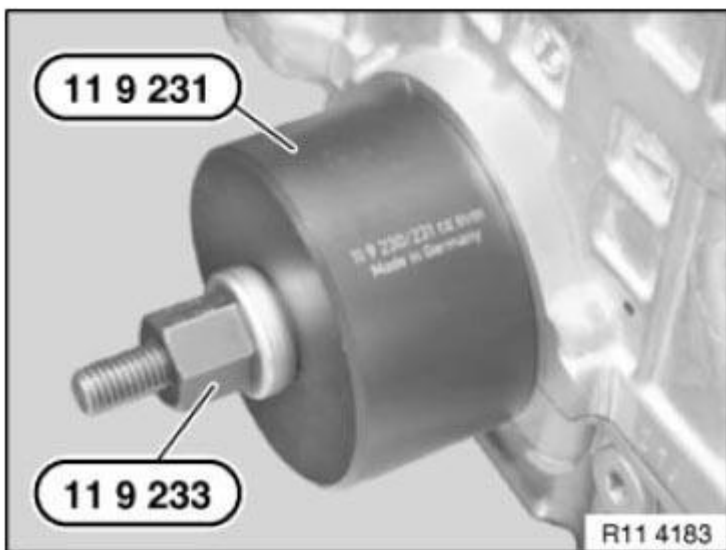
Identifying Special Tools 119 231 And 11 9 233
